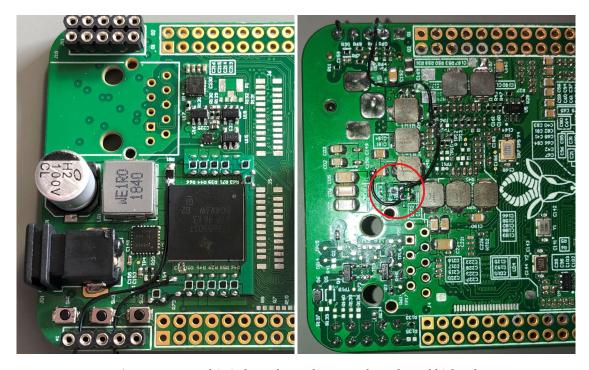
Load Switch Mod Board Mounted on The Bokkiebord
